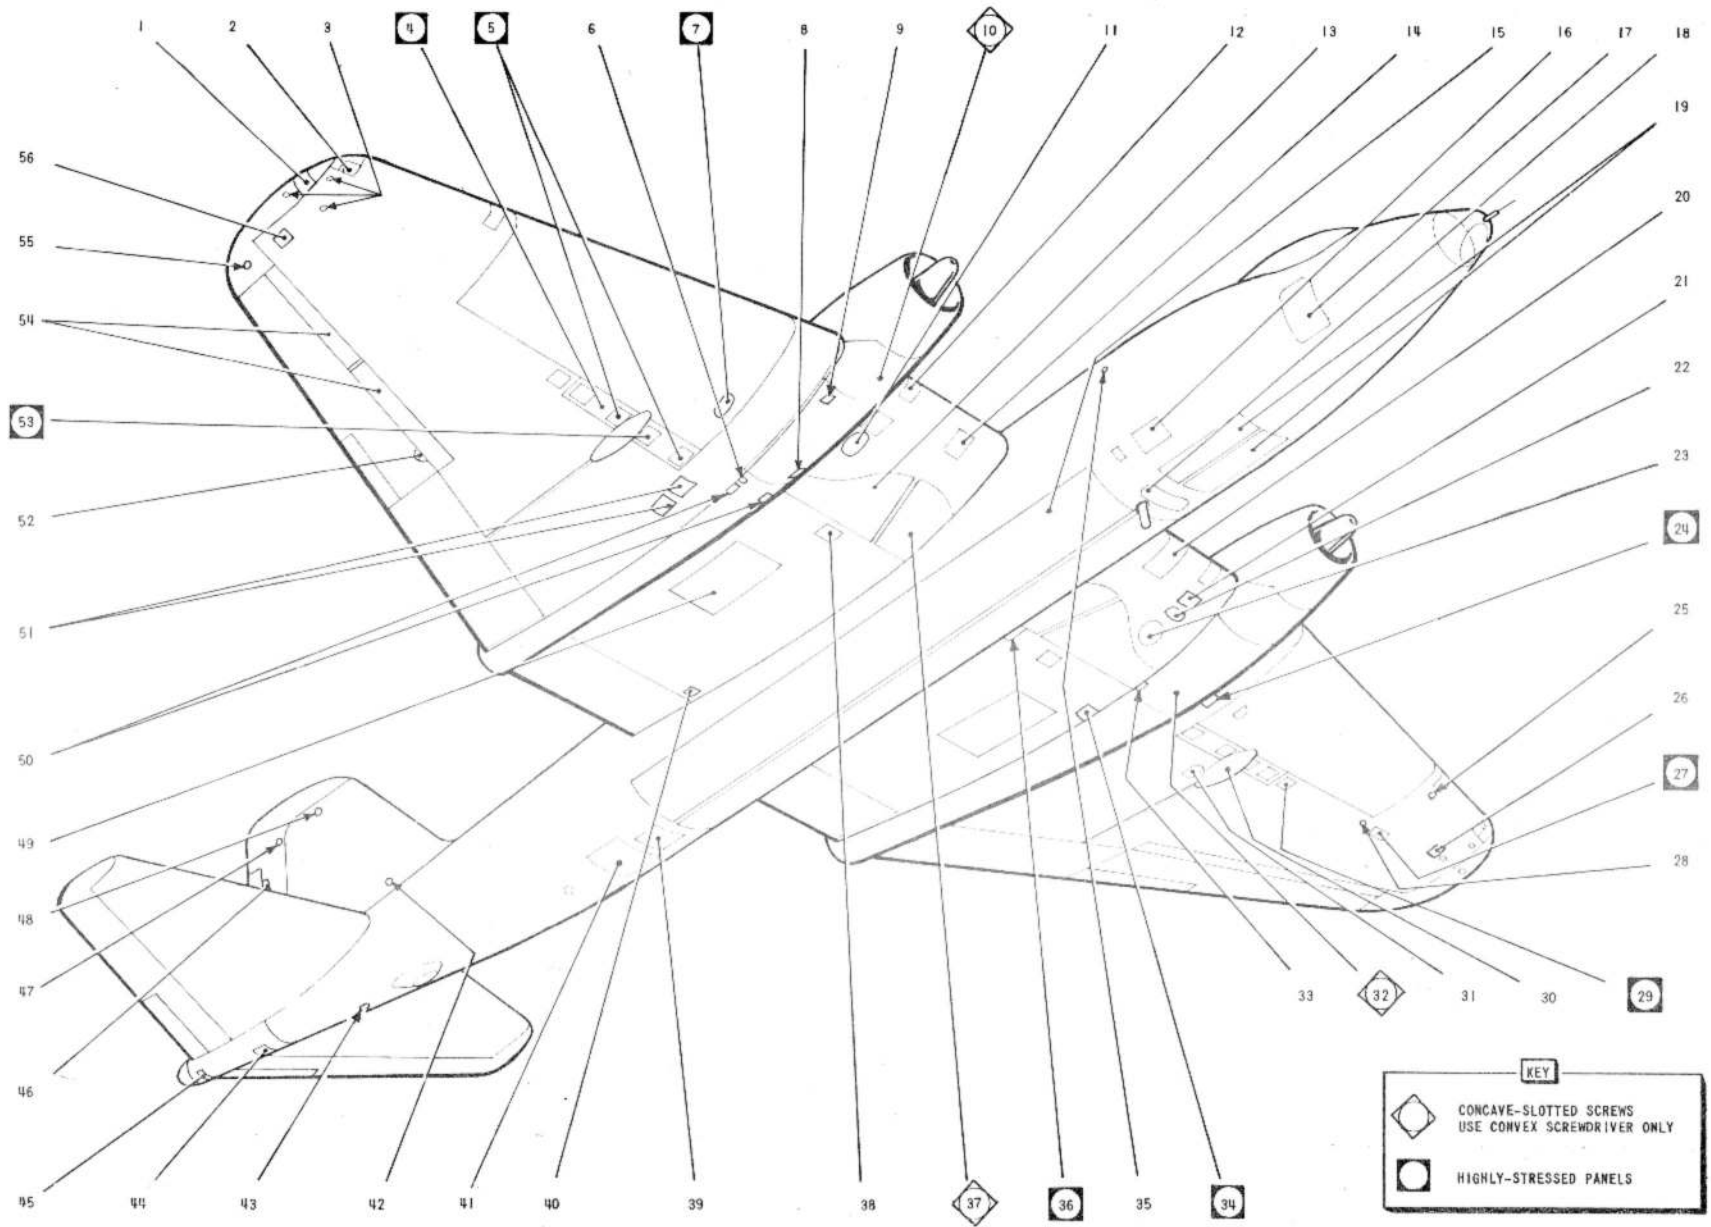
ACCESS PANELS, LOWER SURFACE AND STARBOARD SIDE
